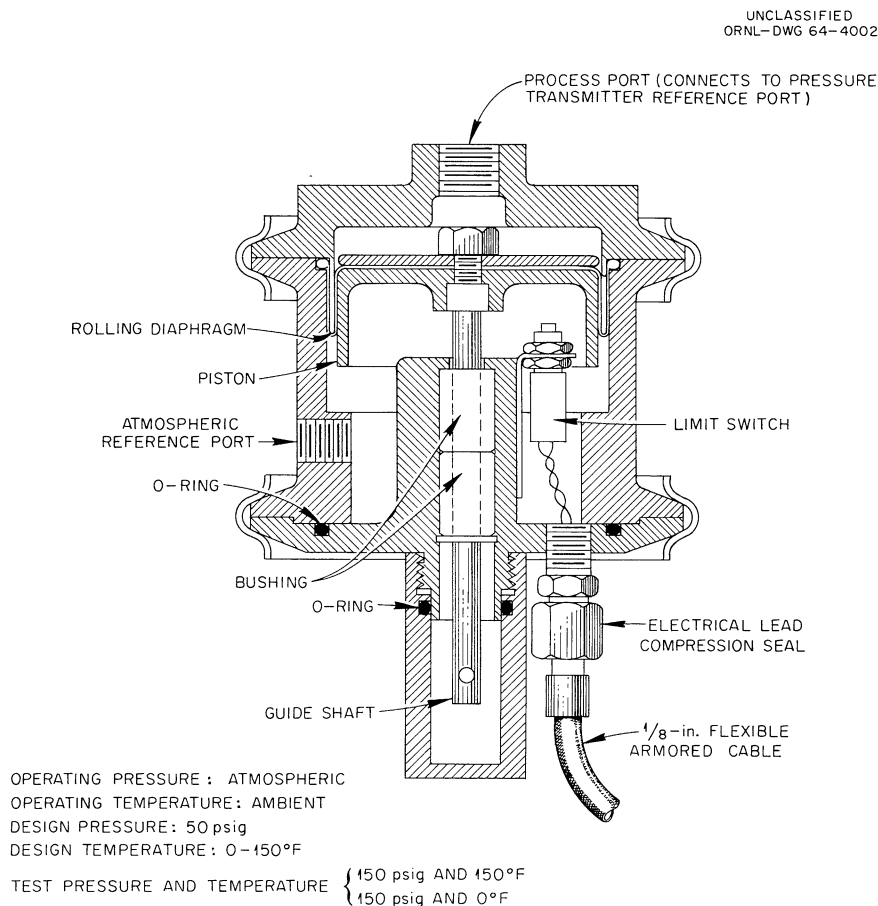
Pressure-Transmitter Expansion Chamber Assembly.
